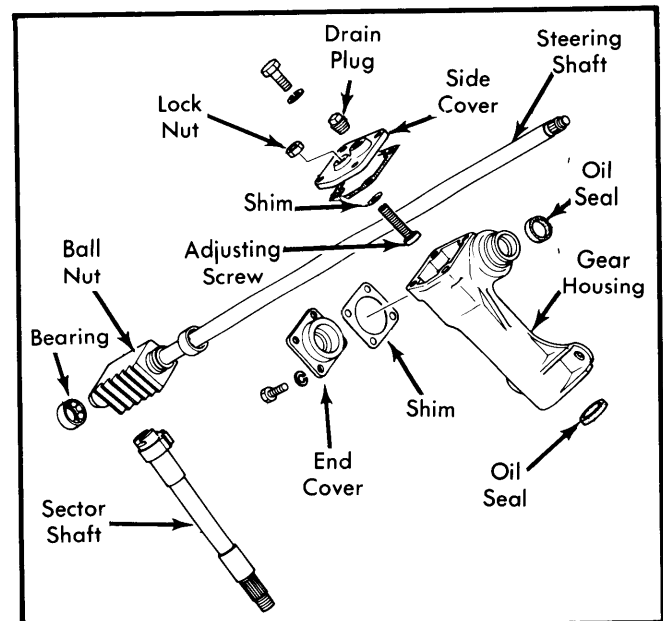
Exploded View of Steering Gear Assembly (B2000 Models)
